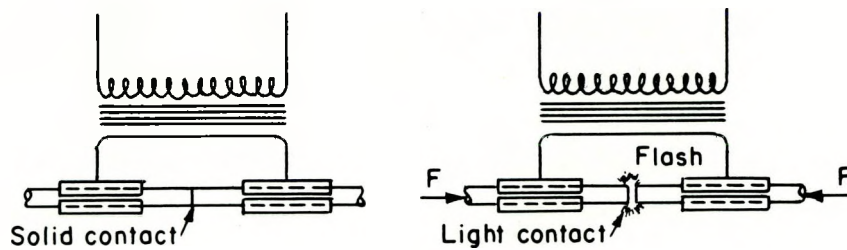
SKETCH SHOWING BASIC CHARACTERISTICS OF FLASH-WELDING PROCESS (Ref. 26)
